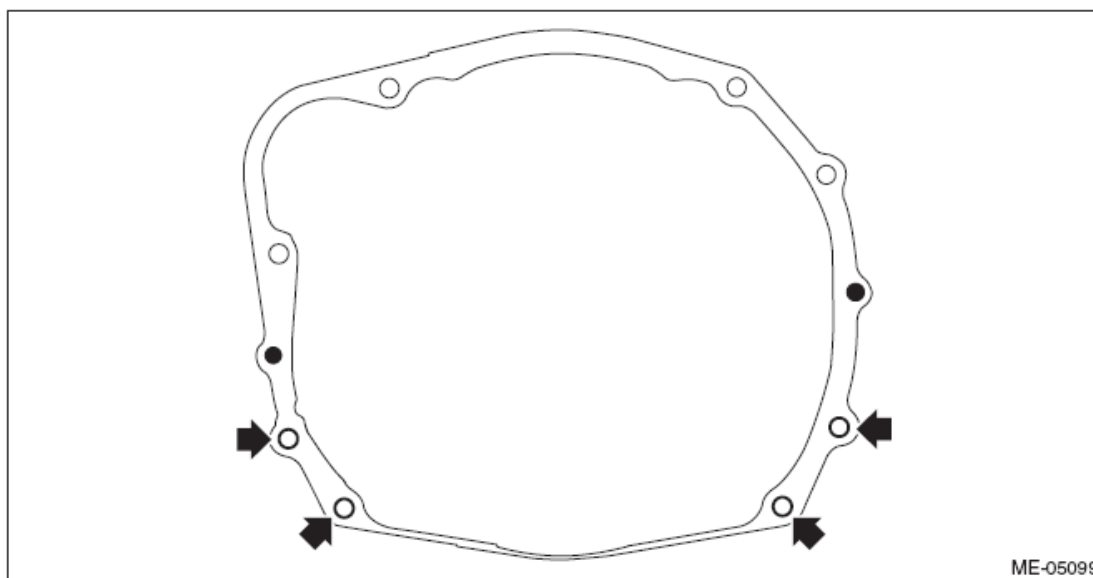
Locating Transmission Lower Side Nut And Bolt (MT Model)
